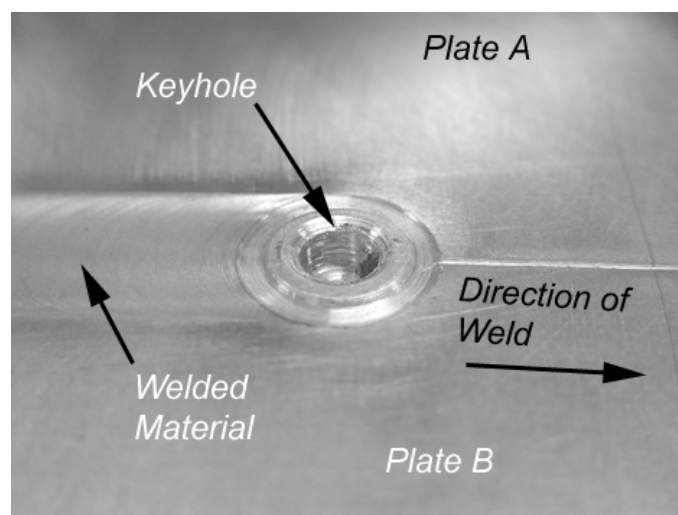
The *keyhole* in a friction stir weld.
